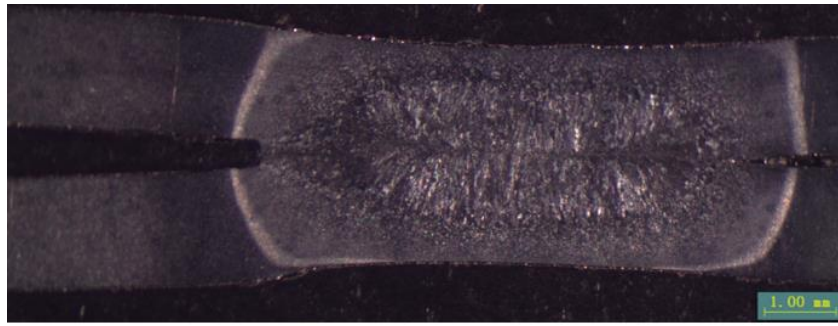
Macroscopic Cross Section of Shim Weld
